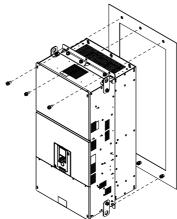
Install the Drive into the Opening of the Enclosure Panel
